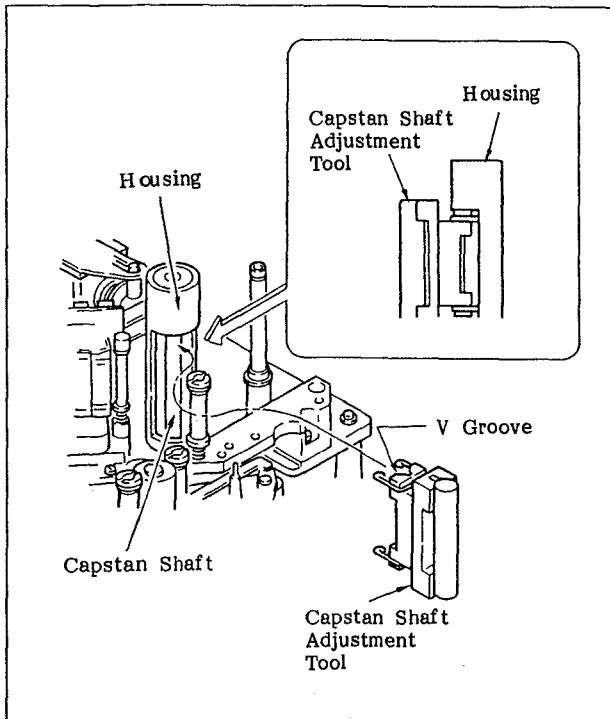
Installing the Capstan Shaft Adjustment Tool
